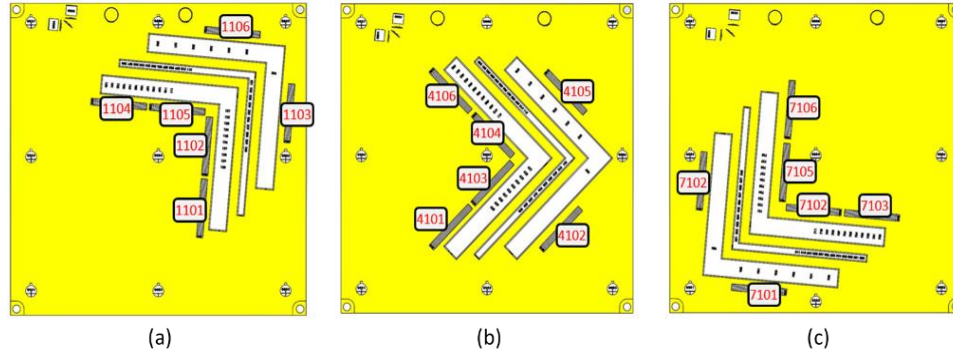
(a) Build layout 1, (b) build layout 2, (c) build layout 3
